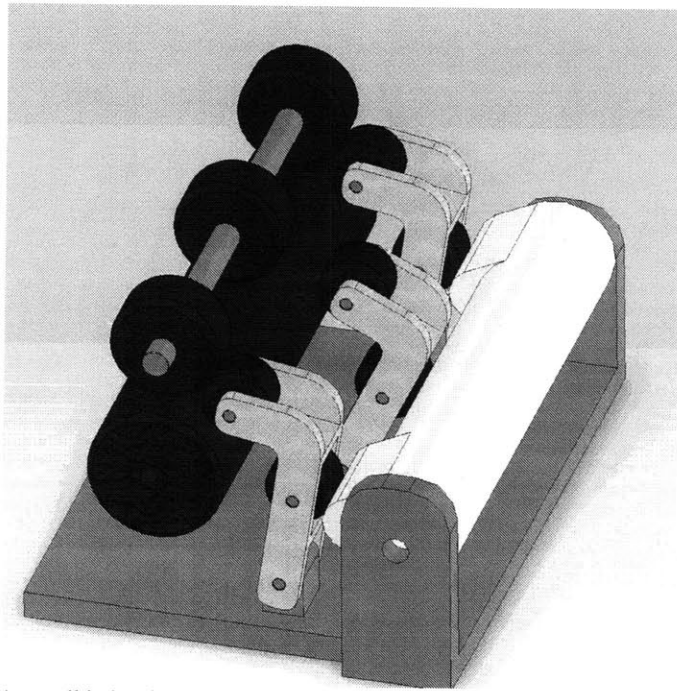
A possible implementation of the cam shaft style switching transmission. The desired output is selected by rotating the cam shaft on the right which moves the idler rollers into and out of contact with the lower drive roller and the upper output rollers.
